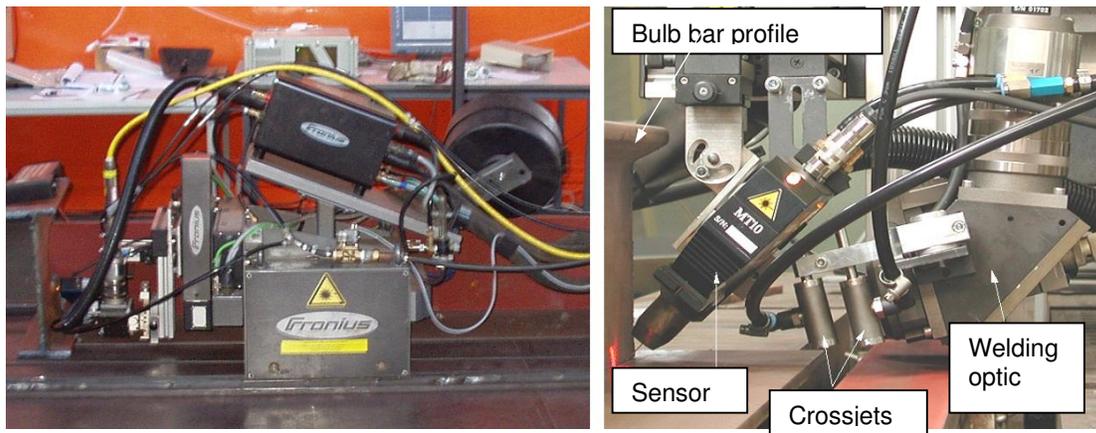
Tractor-guided Laser-GMA Hybrid Welding system (left); Laser-GMA Hybrid welding head (right)
